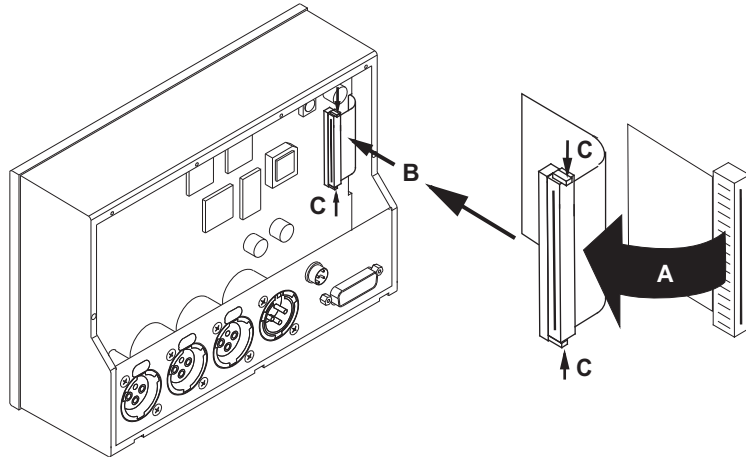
Fastening the connecting flat cable to the main pcb
